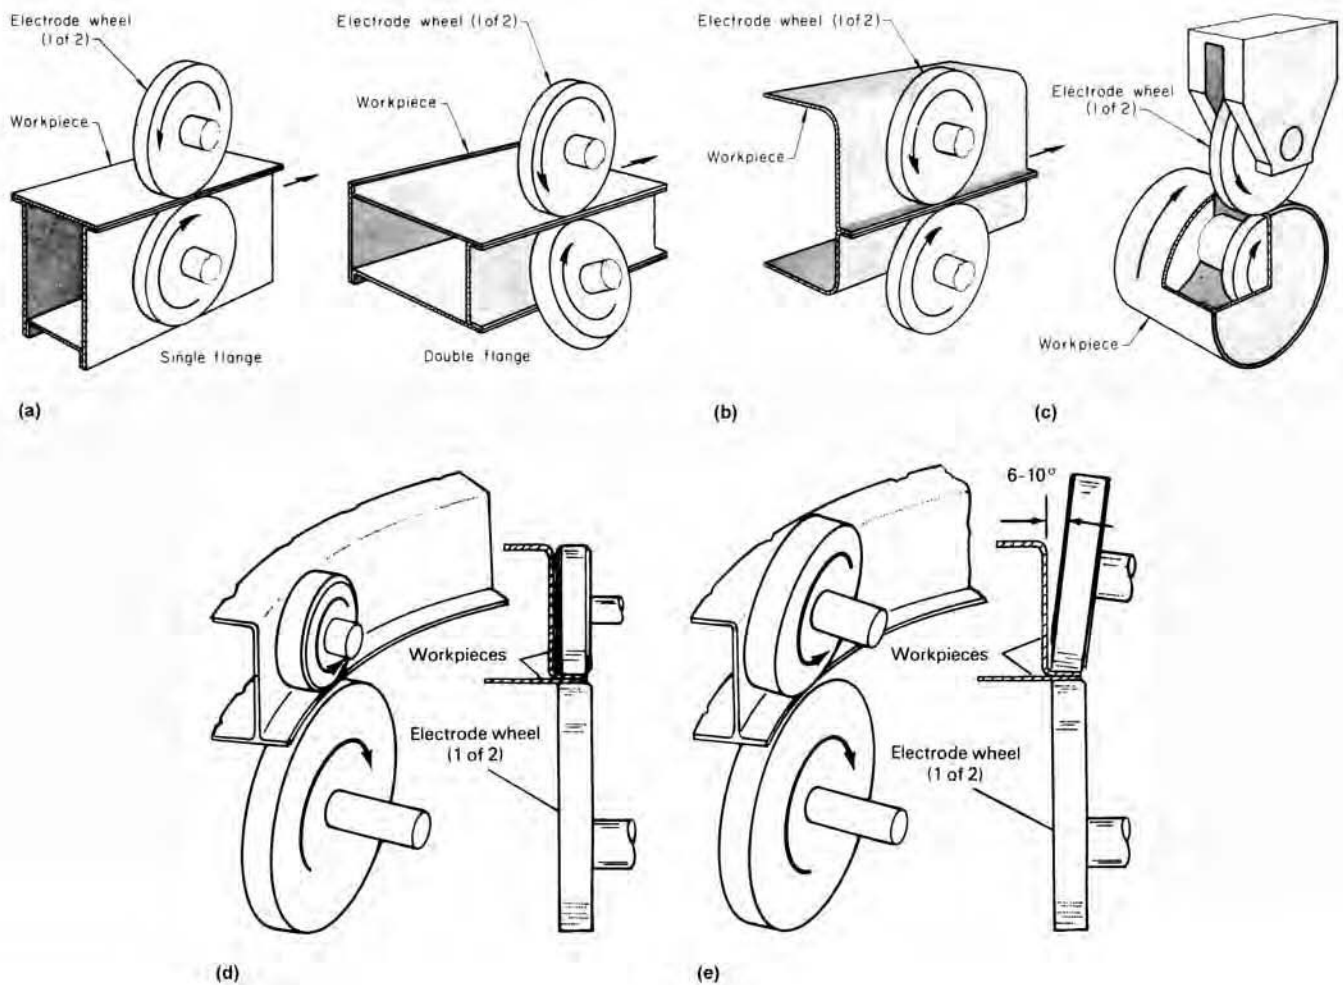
Arrangement of electrode wheels relative to workpiece for selected flange-joint lap seam welds. (a) Single and double flange. (b) Two-member outward flange. (c) Two-member inward flange. (d) Small upper electrode wheel to avoid sidewall interference. (e) Canted large-diameter wheel to avoid sidewall interference
